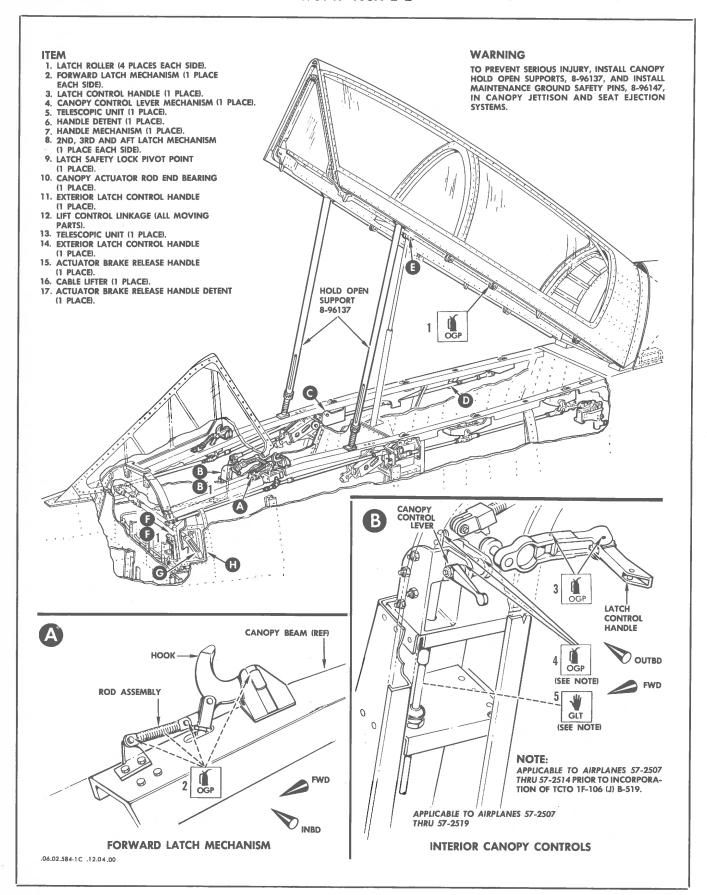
Canopy Components Lubrication, F-106B (Sheet 1 of 3)
